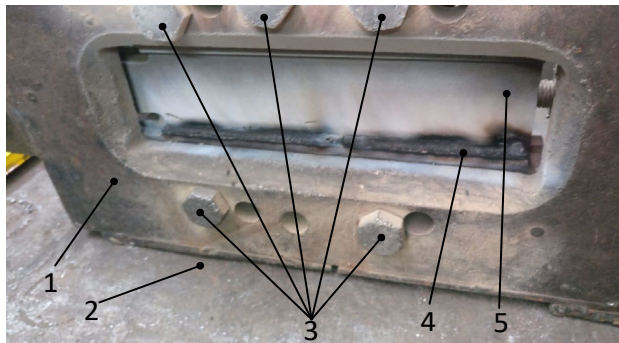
Welded part with fixing in the device [34]
